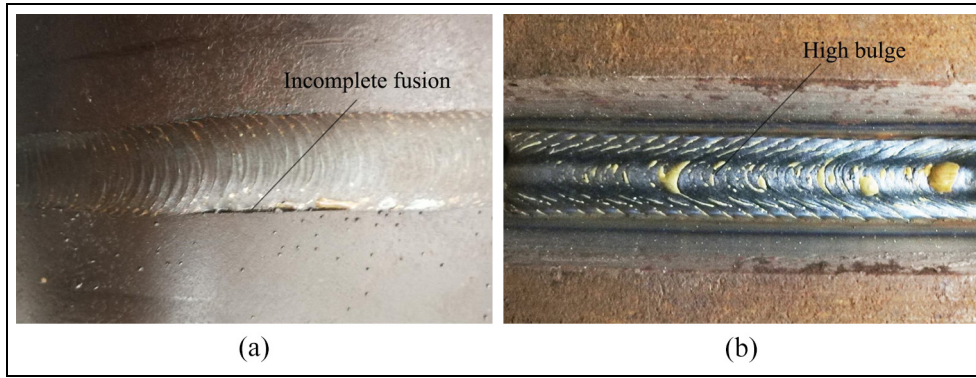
Defect weld image: (a) incomplete fusion and (b) high bulge of weld.
